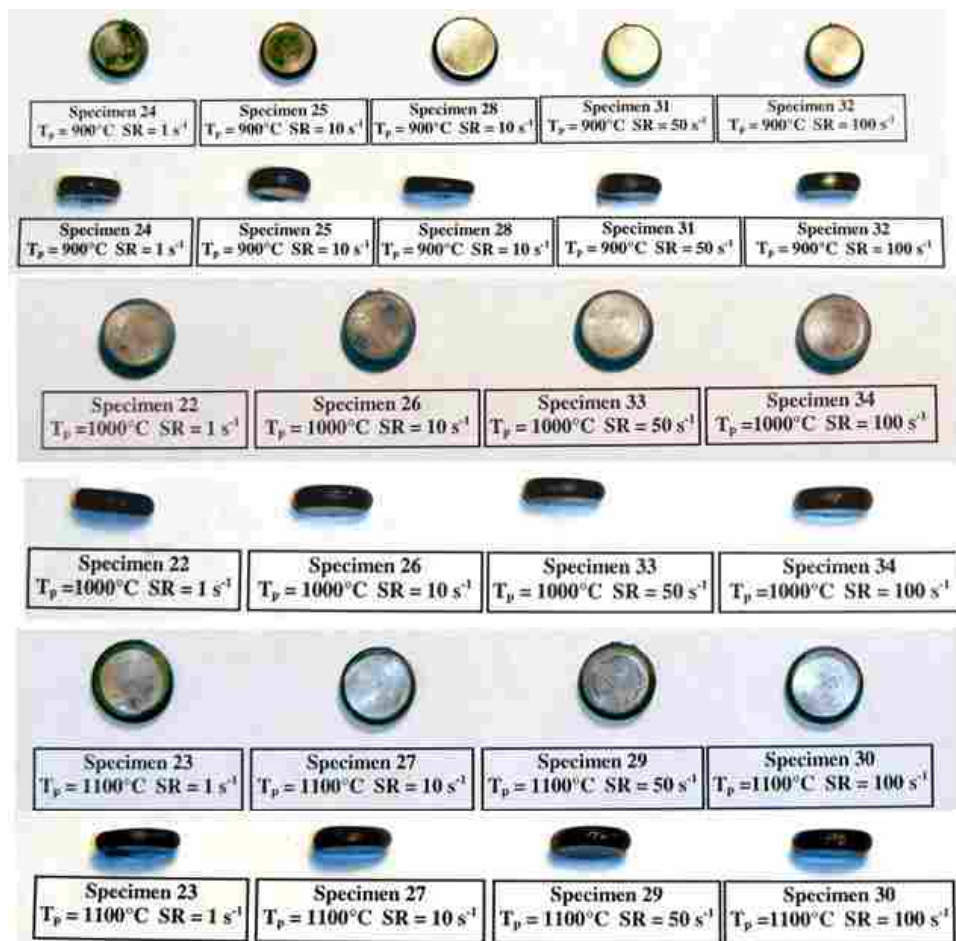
Photographs of iso-thermal uniaxial hot compression test specimens after testing.
